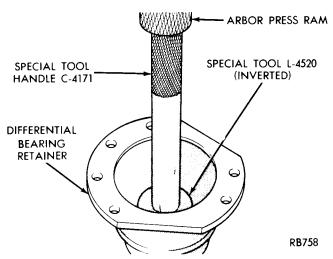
Install New Oil Seal into Differential Bearing Retainer
